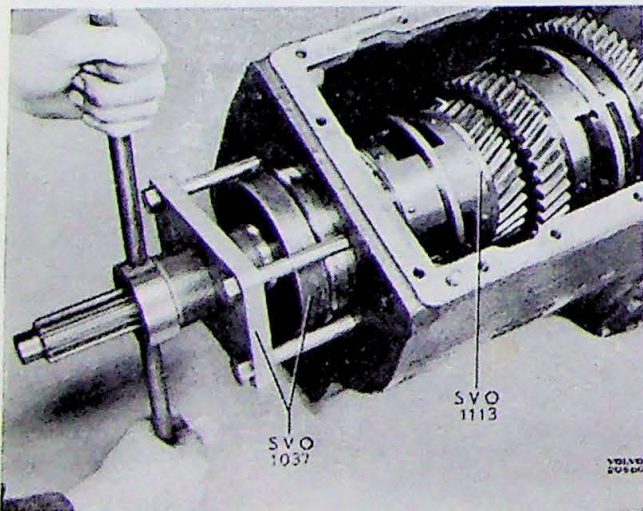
38. Fitting the bearing on the main drive pinion, K 13.
